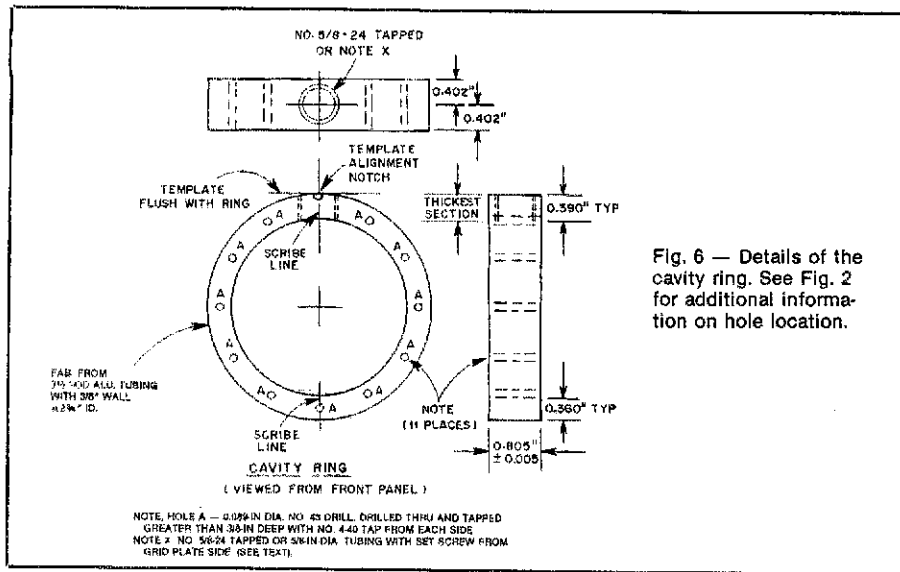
Details of the cavity ring. See Fig. 2 for additional information on hole location.
